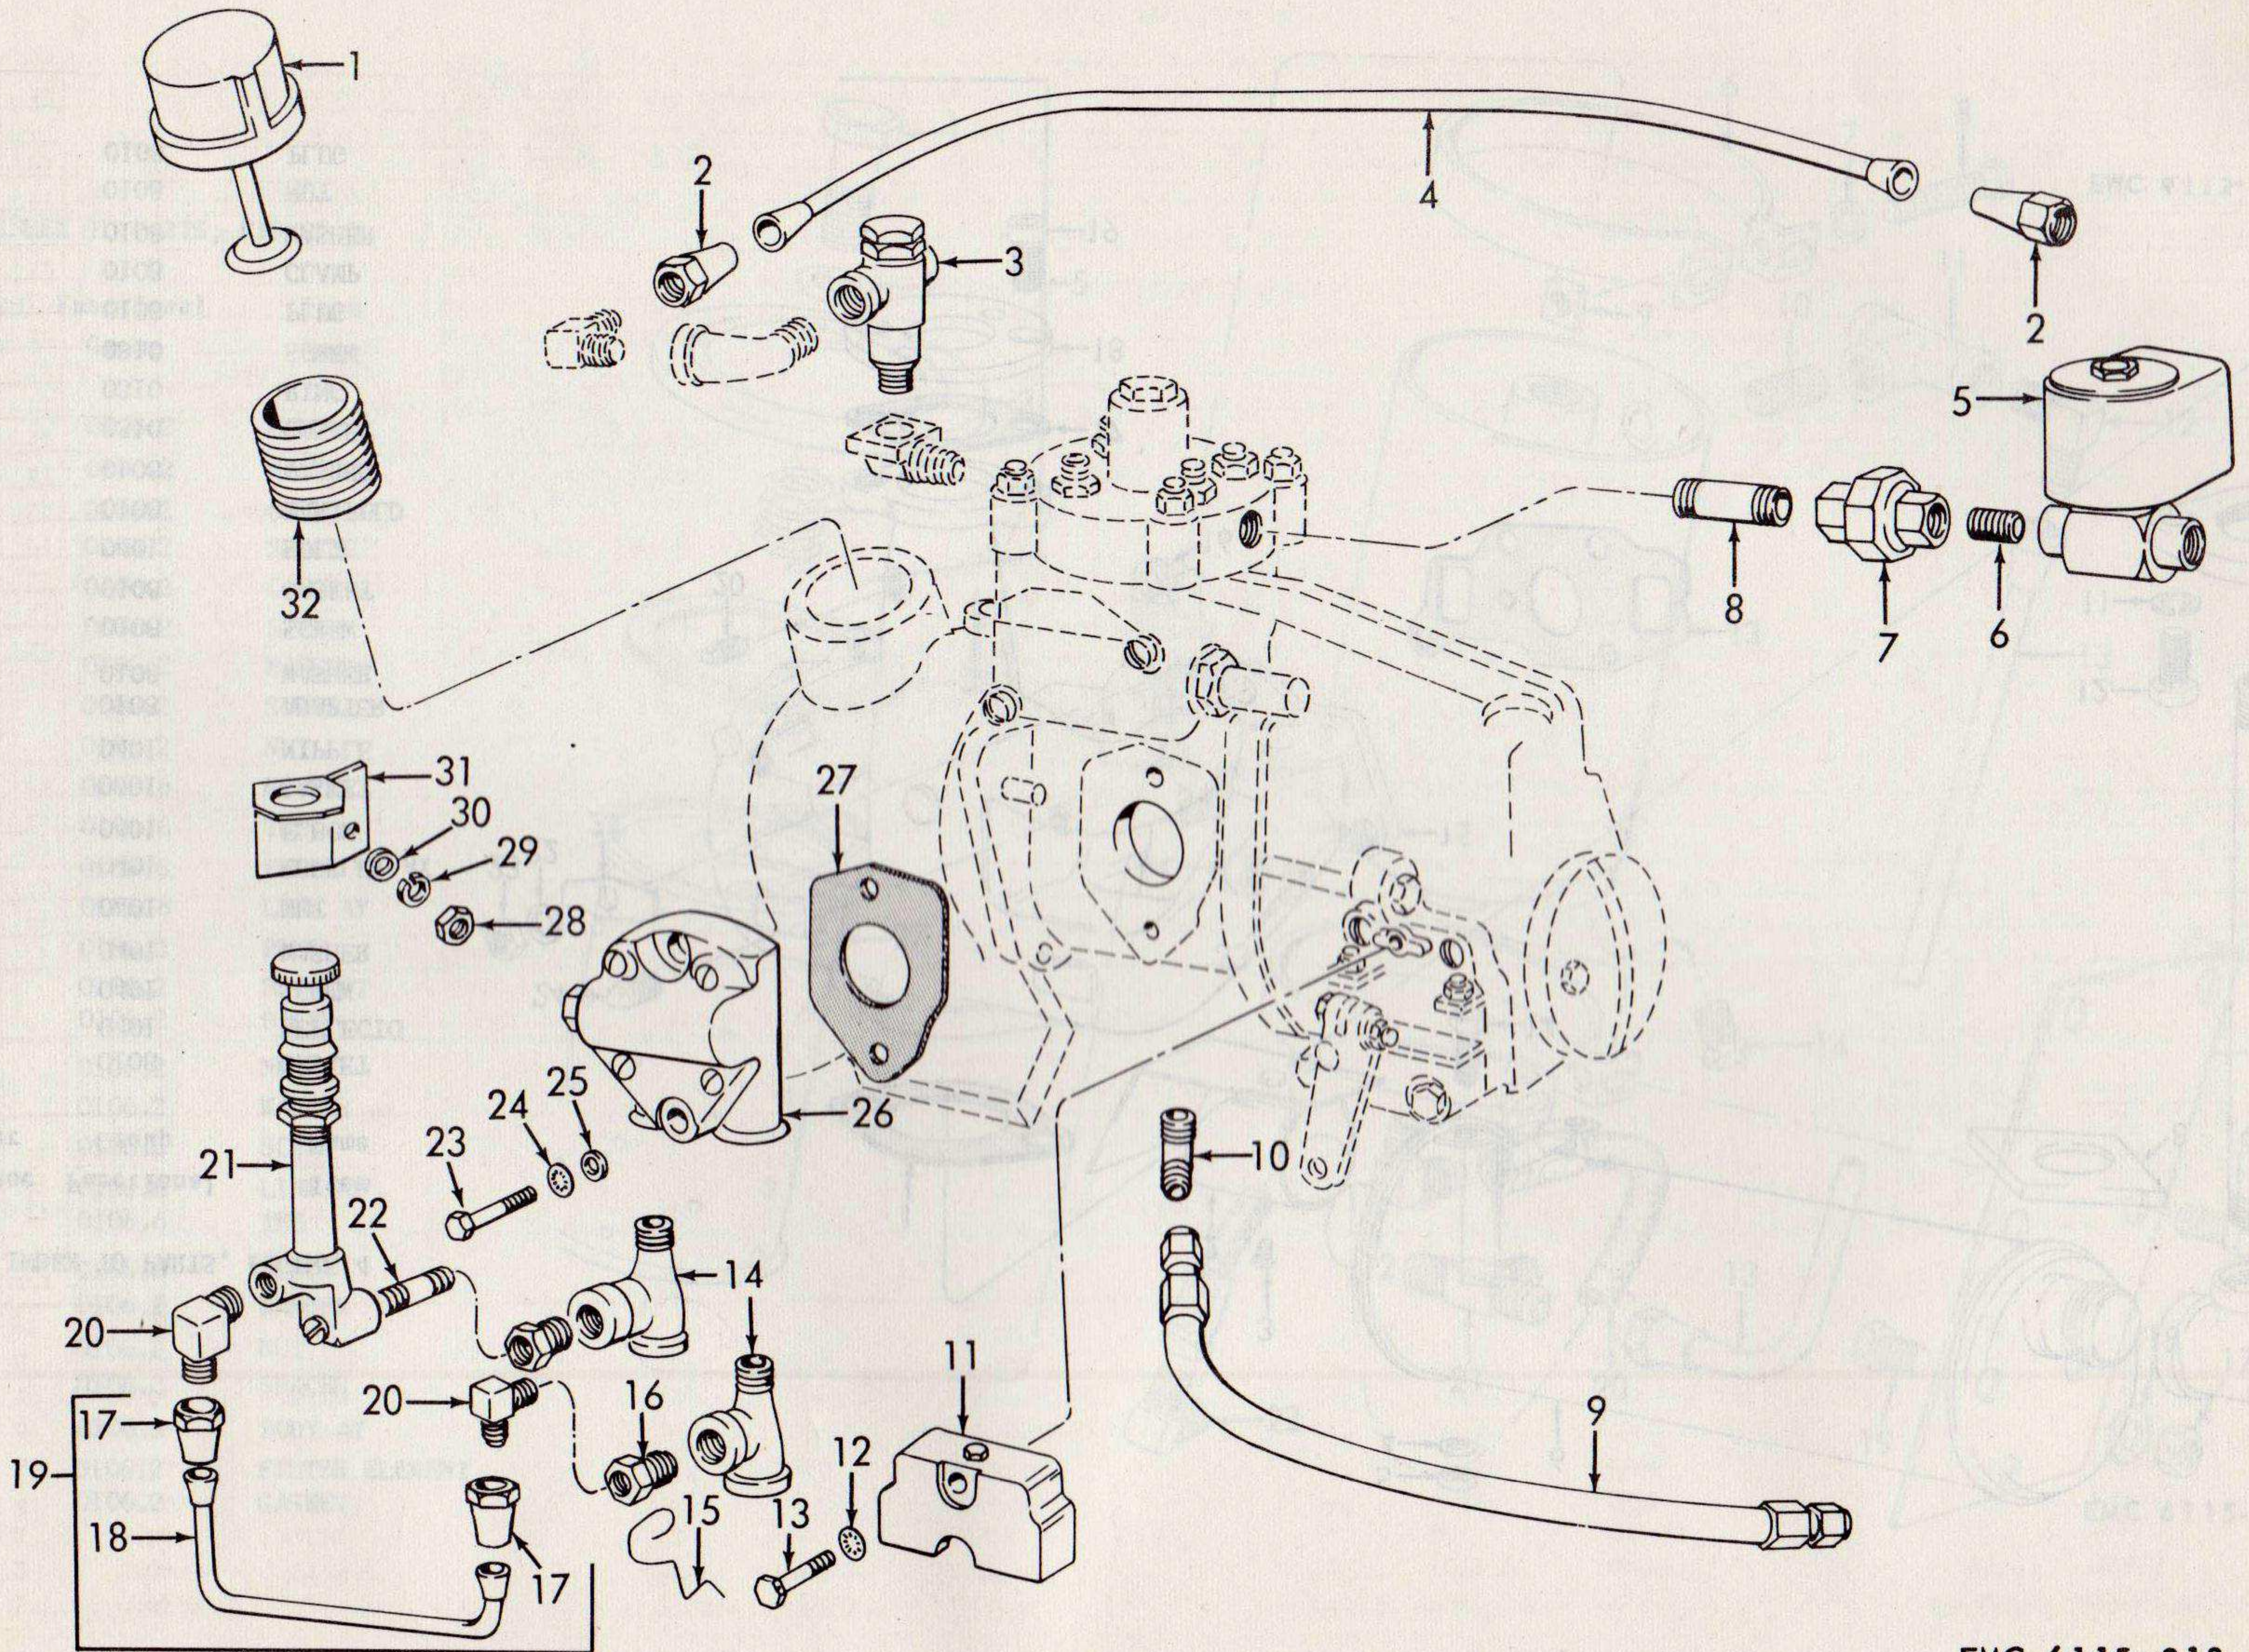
Fuel Transfer and Primer Pumps, Oil Filler Cap, Valves, Lines, and related parts.
